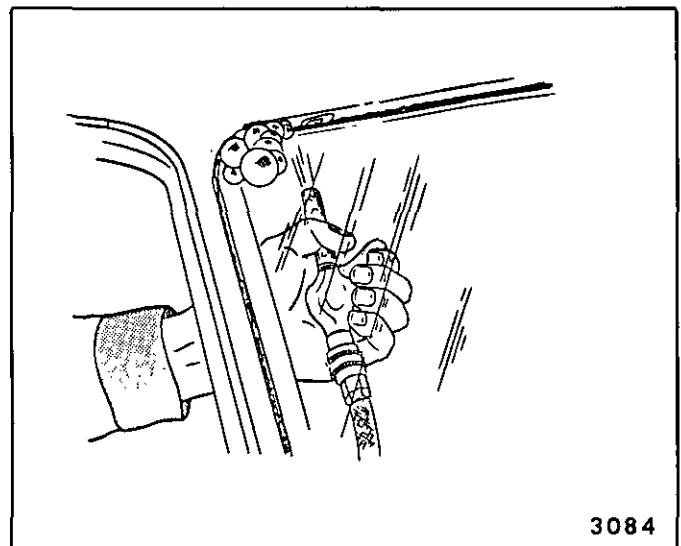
Air Hose and Bubble Solution Test of Windshield Glass Sealant
